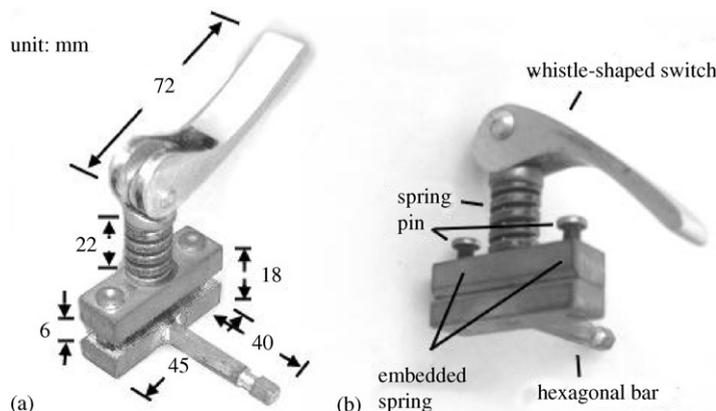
Fixture to clamp metal wire: (a) release, (b) clamp.
